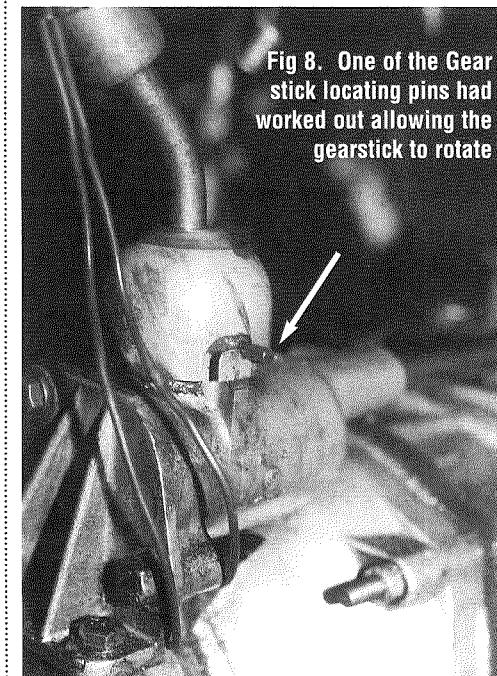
One of the Gear stick locating pins had worked out allowing the gearstick to rotate
